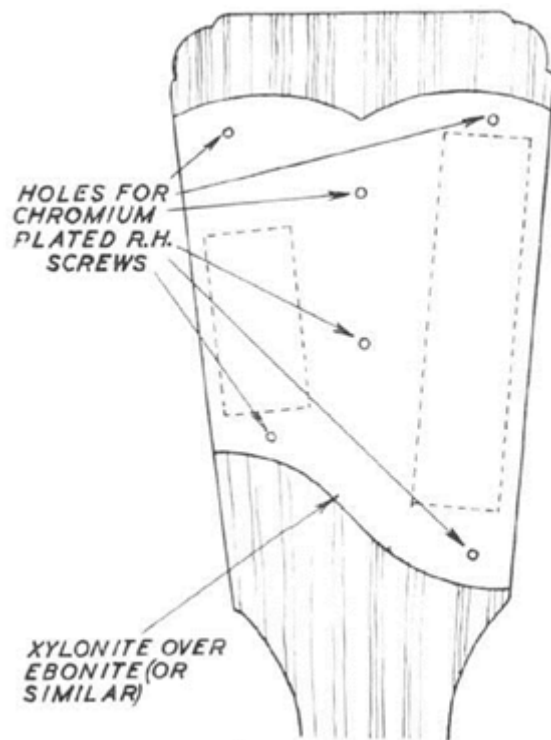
DETAILS OF THE MACHINE COVER PLATE
